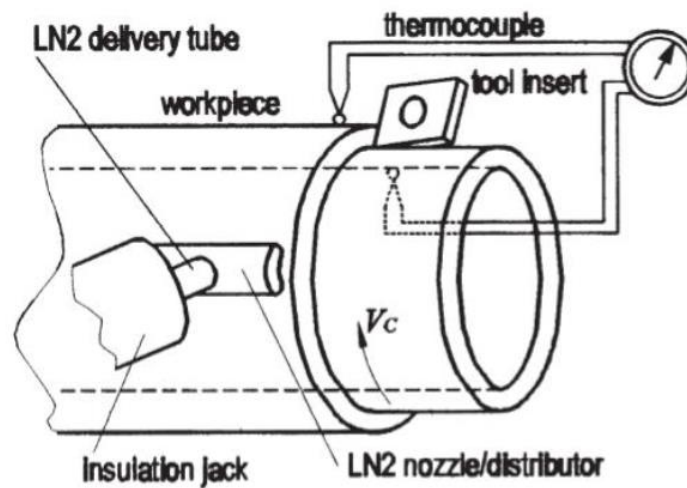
Cryogenic workpiece pre-cooling (Hong and Ding 2001)
